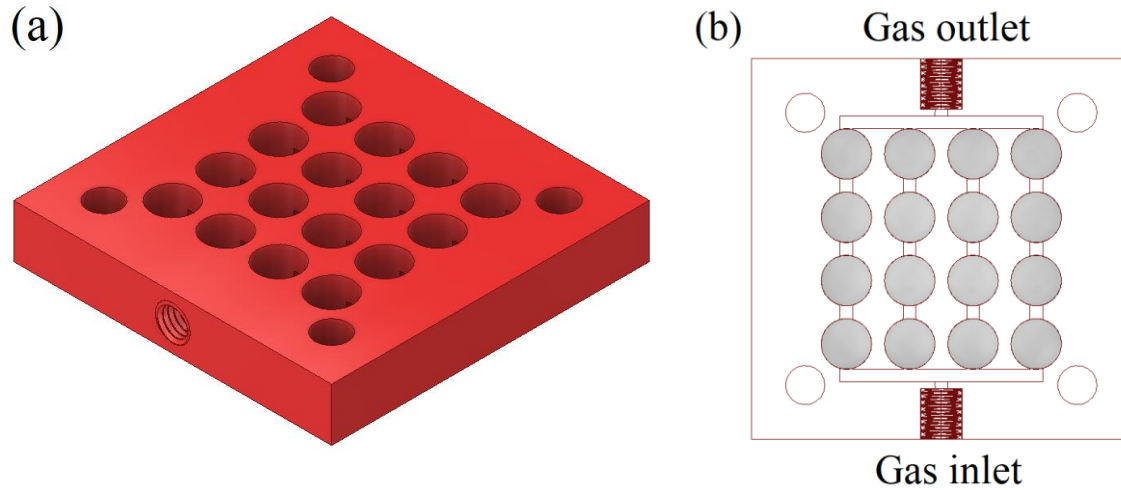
(a) 3-dimensional isometric view of the gas part. (b) 2-dimensional top view of the gas part, showing the gas inlet, gas outlet and the 4 channels that connect the 16 holes at the center of the cell.
